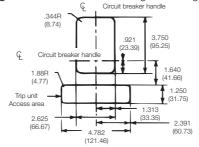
circuit breaker escutcheon dimensions for 3-pole circuit breakers
